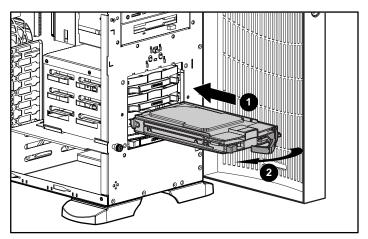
Inserting the hot-plug hard drive and closing the ejector lever
